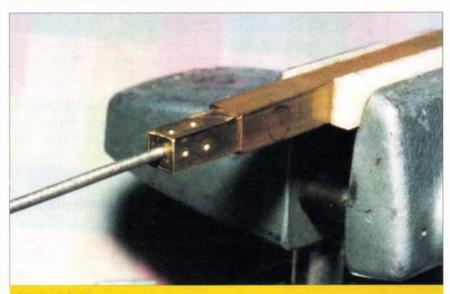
Here the follower nut is permanently mounted in the inner slide tube with center-punched dimples. Check that the tubes still have a loose sliding fit after the dimpling operation, filing as necessary to restore the correct fit. You may also need to run the tap once again through the nut to counteract any distortion caused by the dimples.
